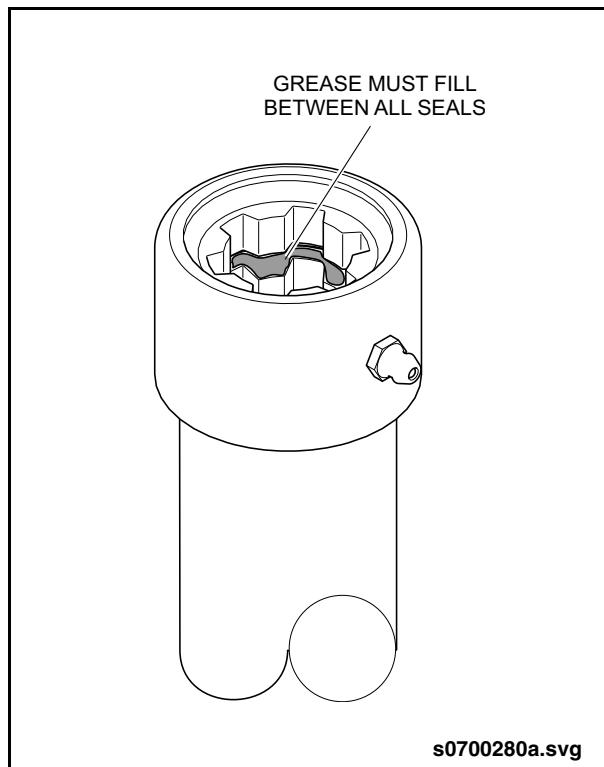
Steering Driveshaft Seal Inspection
